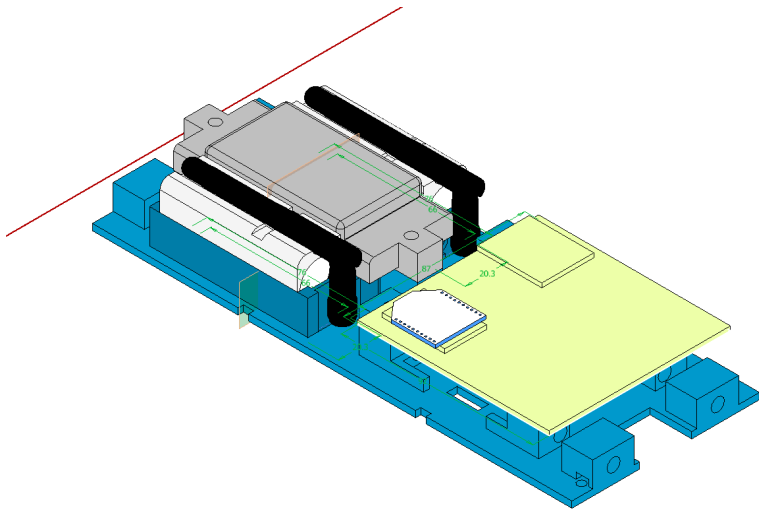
Avionics bay assembly showing battery, holder, and electronics integration
